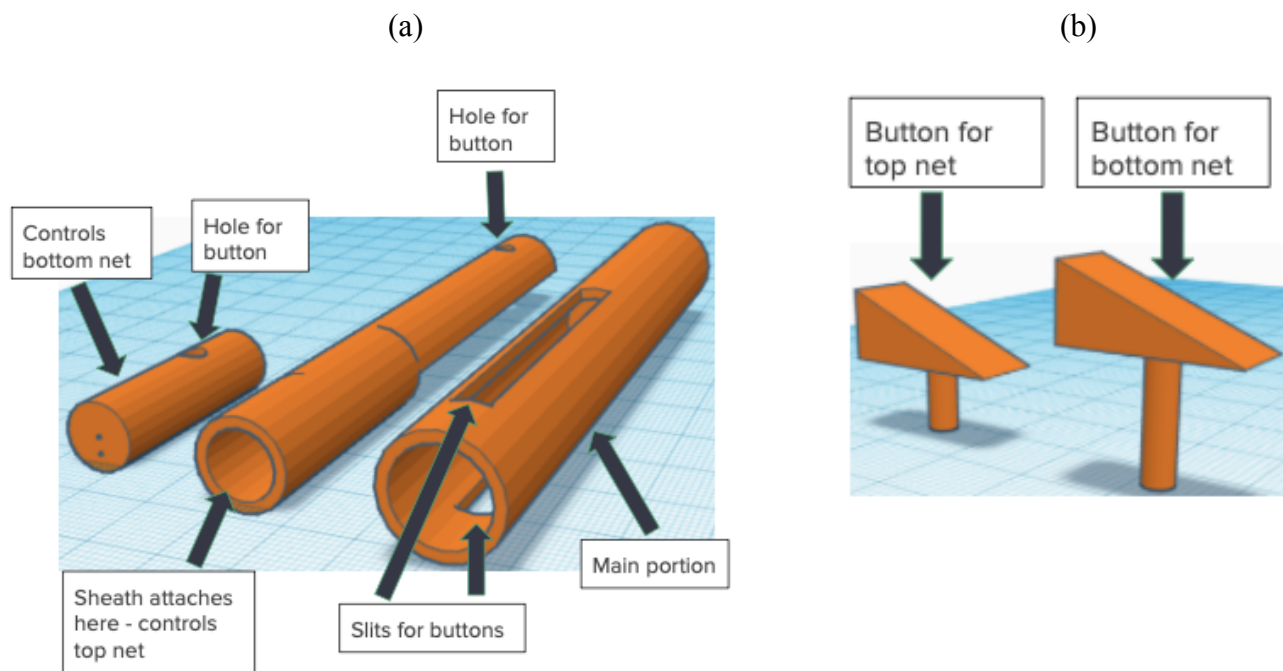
a) From left to right: Short cylindrical tube, long half cylindrical tube with a full cylinder at the end, and the main body of the handle. b) Triangular shaped buttons that go into the short cylindrical tube and the long half cylindrical tube.
